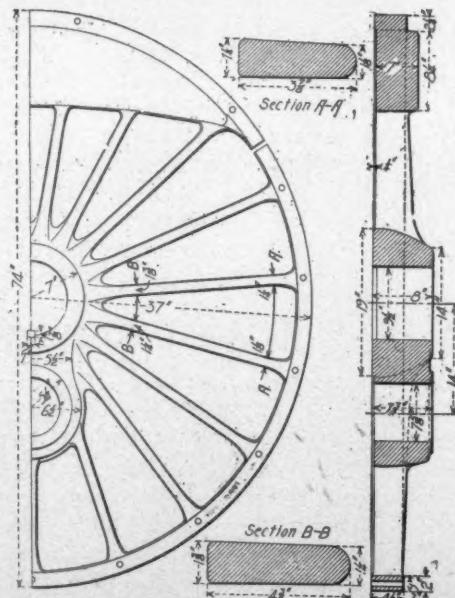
Lake Shore Passenger Front and Rear Wheels.
